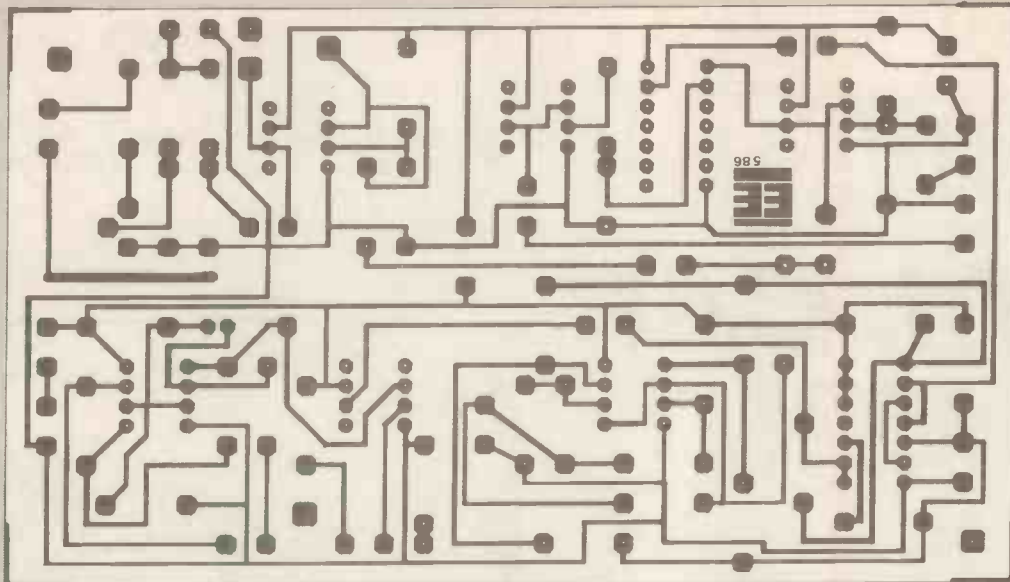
Full size printed circuit board master foil pattern. This board is available from the *EE PCB Service*, code EE586.
